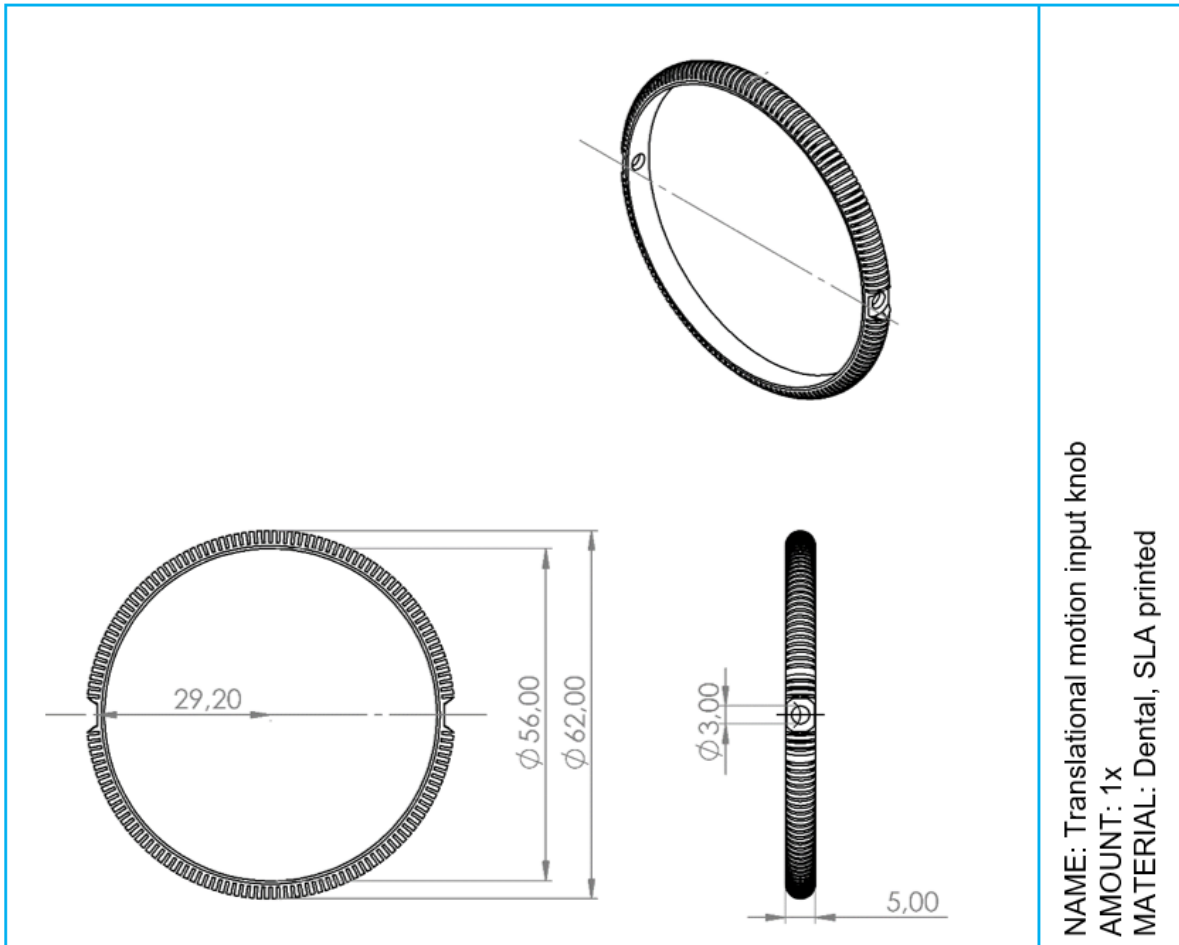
Construction drawings of translational motion input knob - 3D Printed prototype
